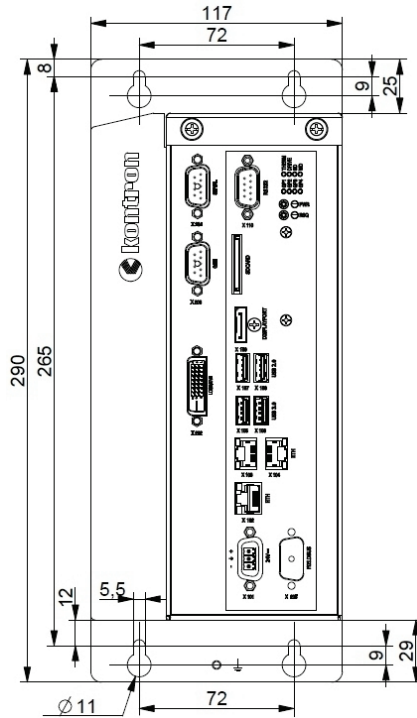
Dimensions: detail key hole (KBox C-102-0)
